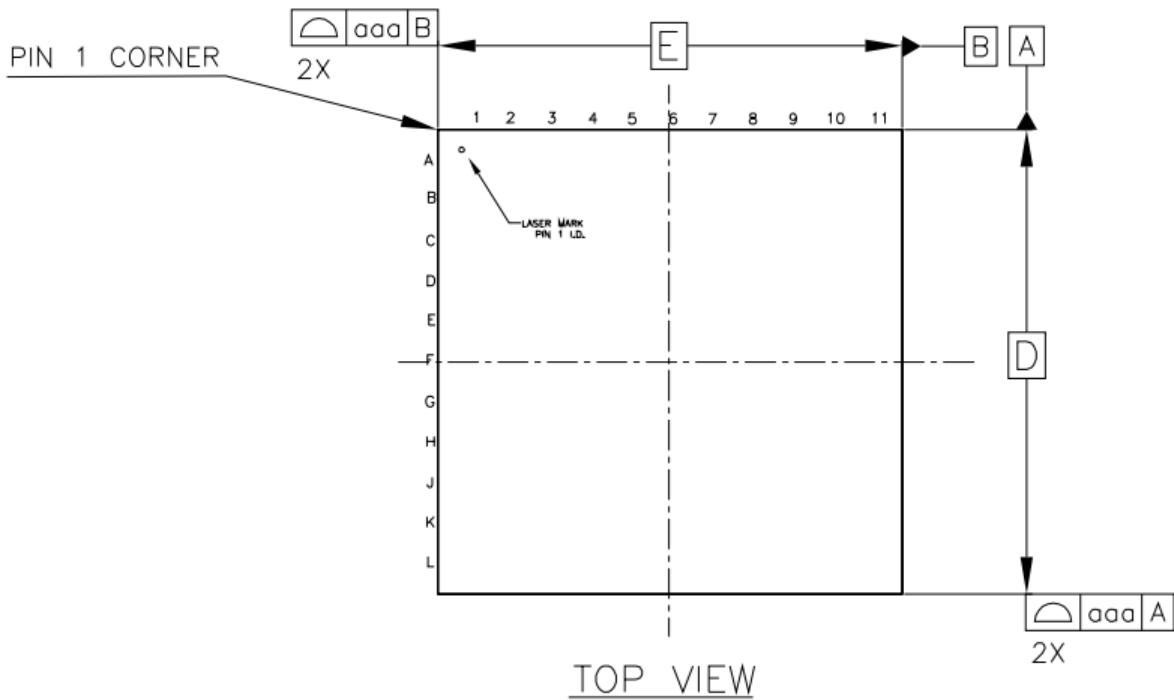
RKNanoD-GLFBGA121 Package Top View
